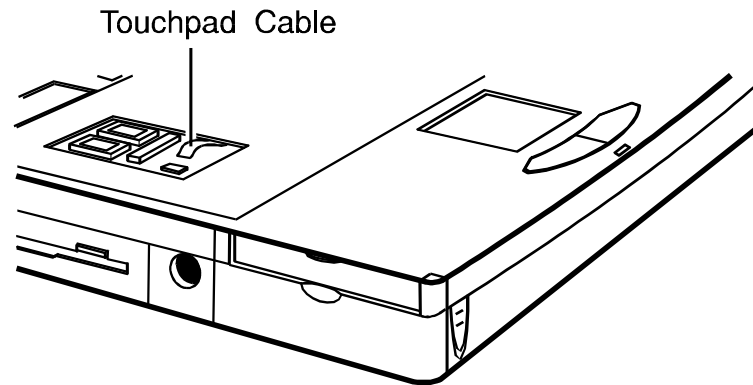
UNPLUGGING THE TOUCHPAD CABLE
